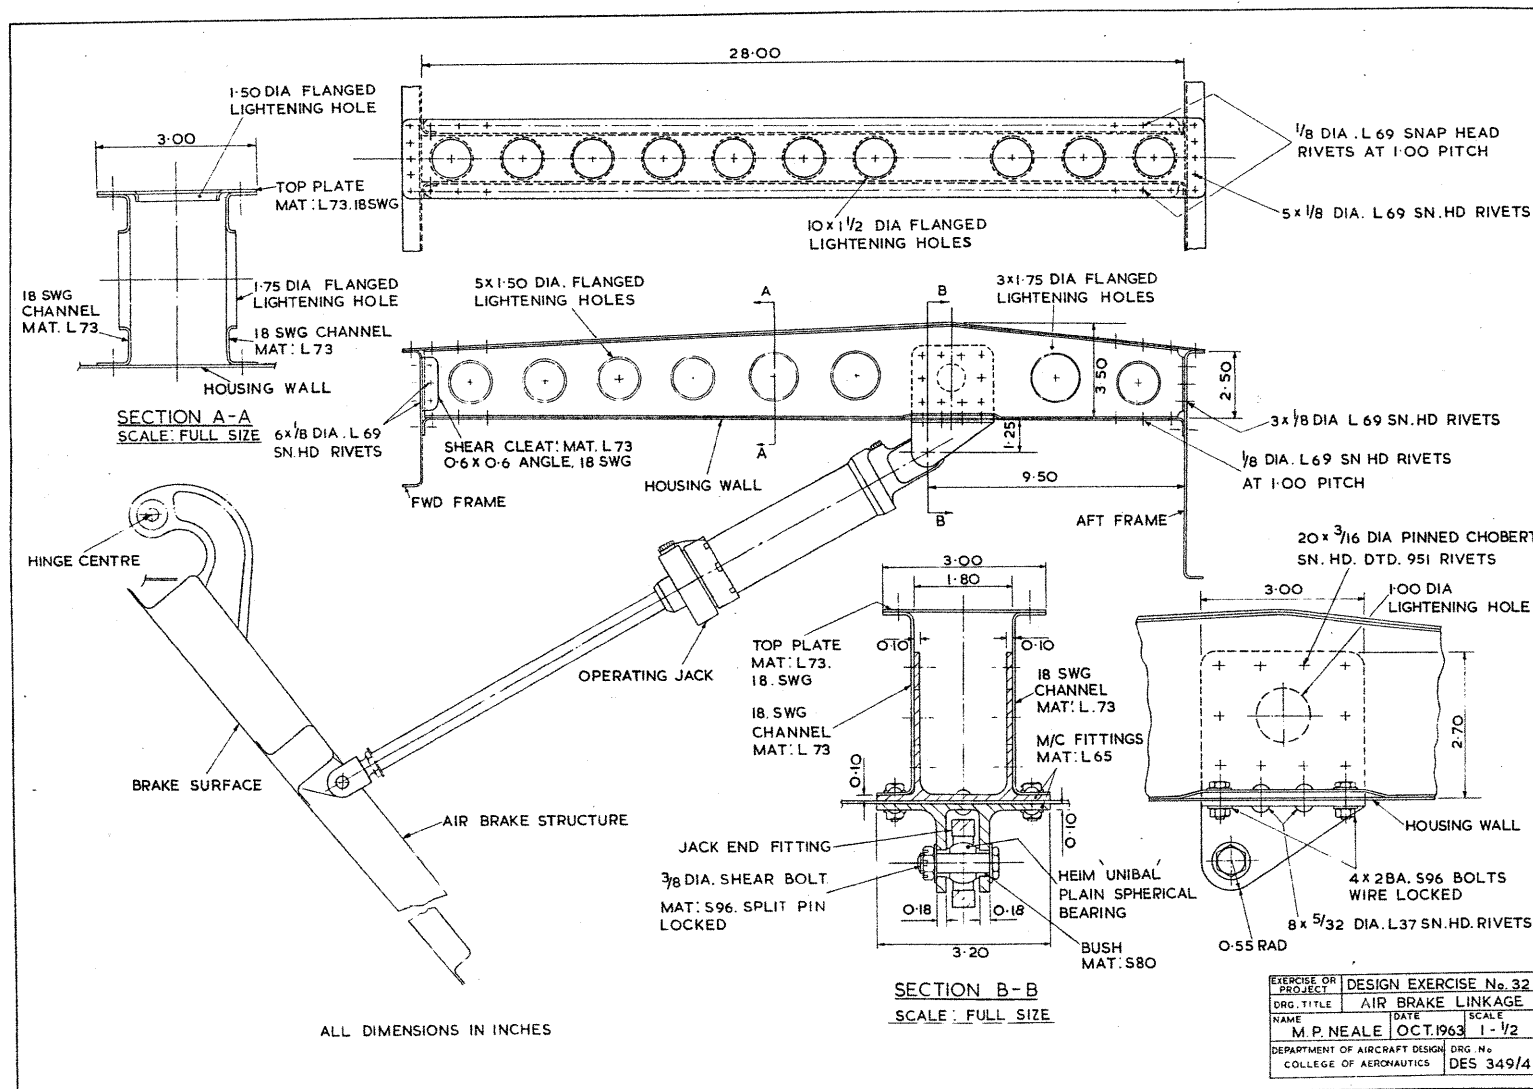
COMPLETED DRAWING OF 1st TERM EXAMPLE.
